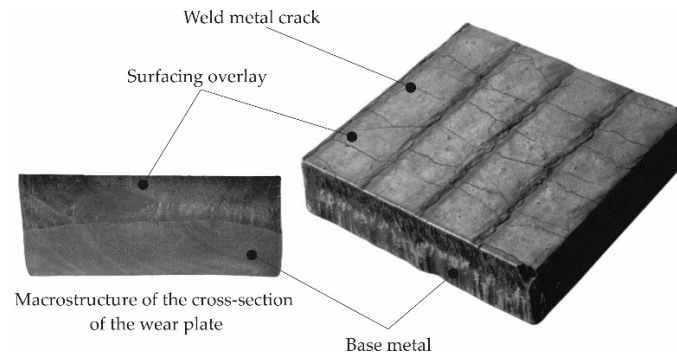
Overview and cross-section of the hardfaced composite wear-resistant plate produced by the automated flux-cored arc welding self-shielded (FCAW-SS) alloy.
